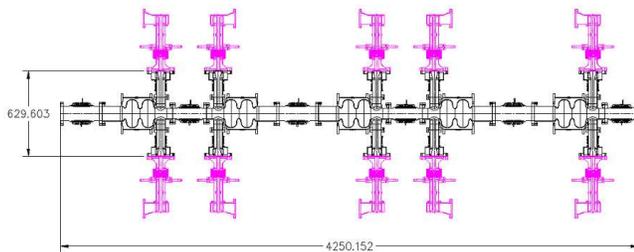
Layout of the 5-cavity string of the Cornell ERL prototype injector.
